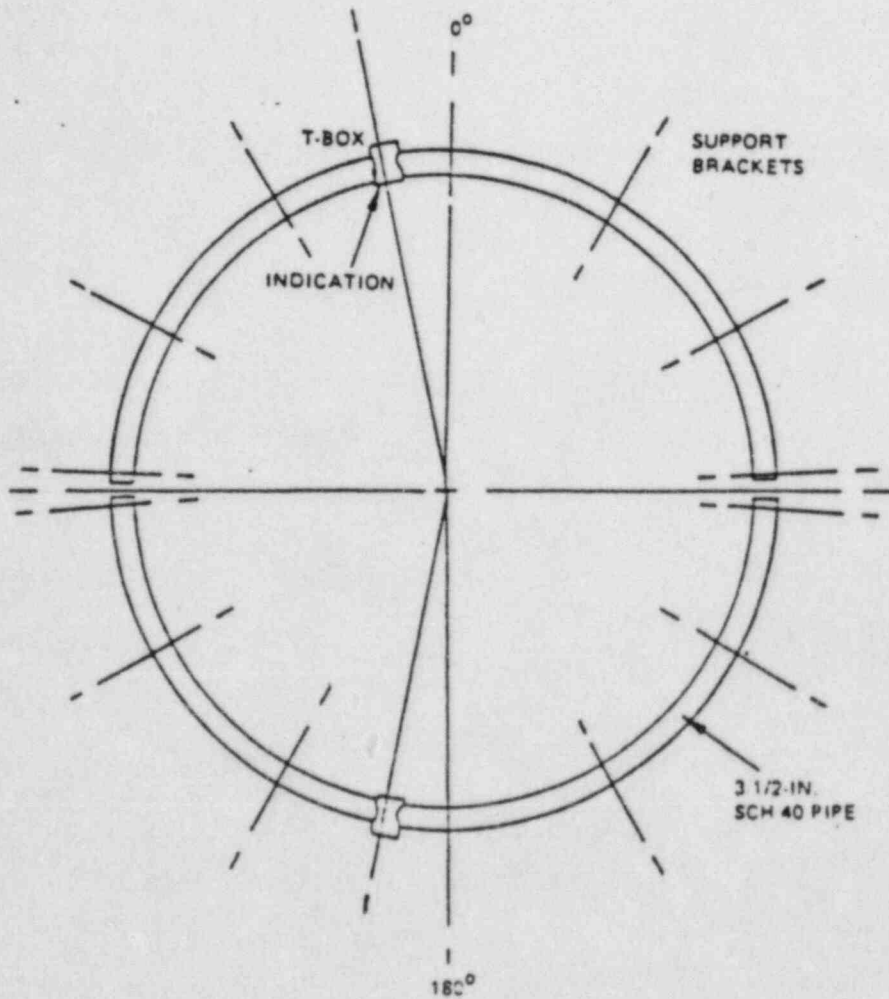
Plan View of Cracked Core Spray Sparger
